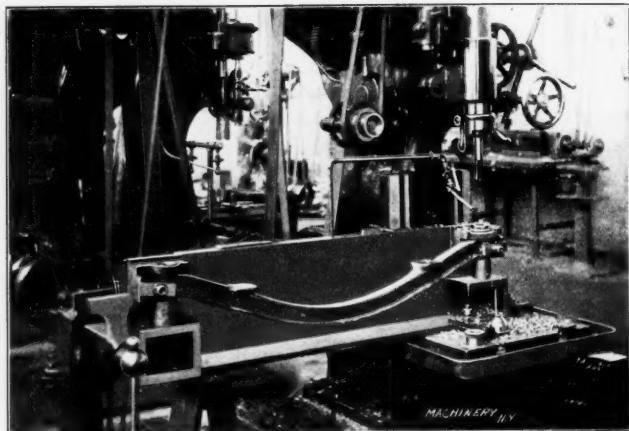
Drilling and Reaming Pin Holes in the Front Axle for the Steering Knuckles
